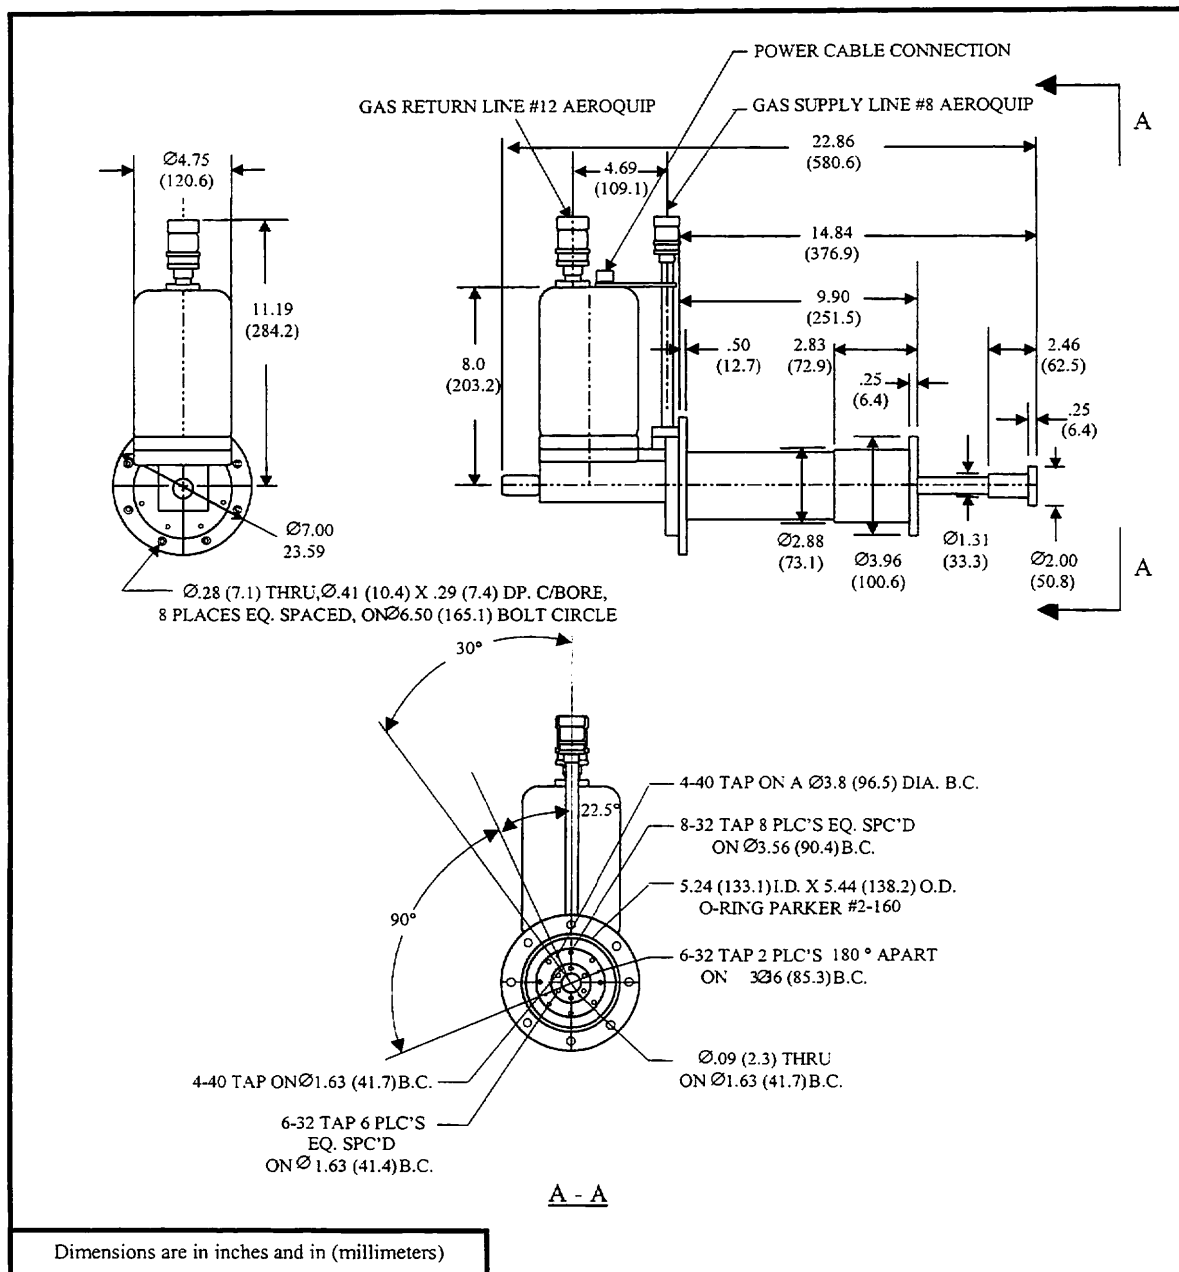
OUTLINE DRAWING FOR THE COOLPOWER 150
